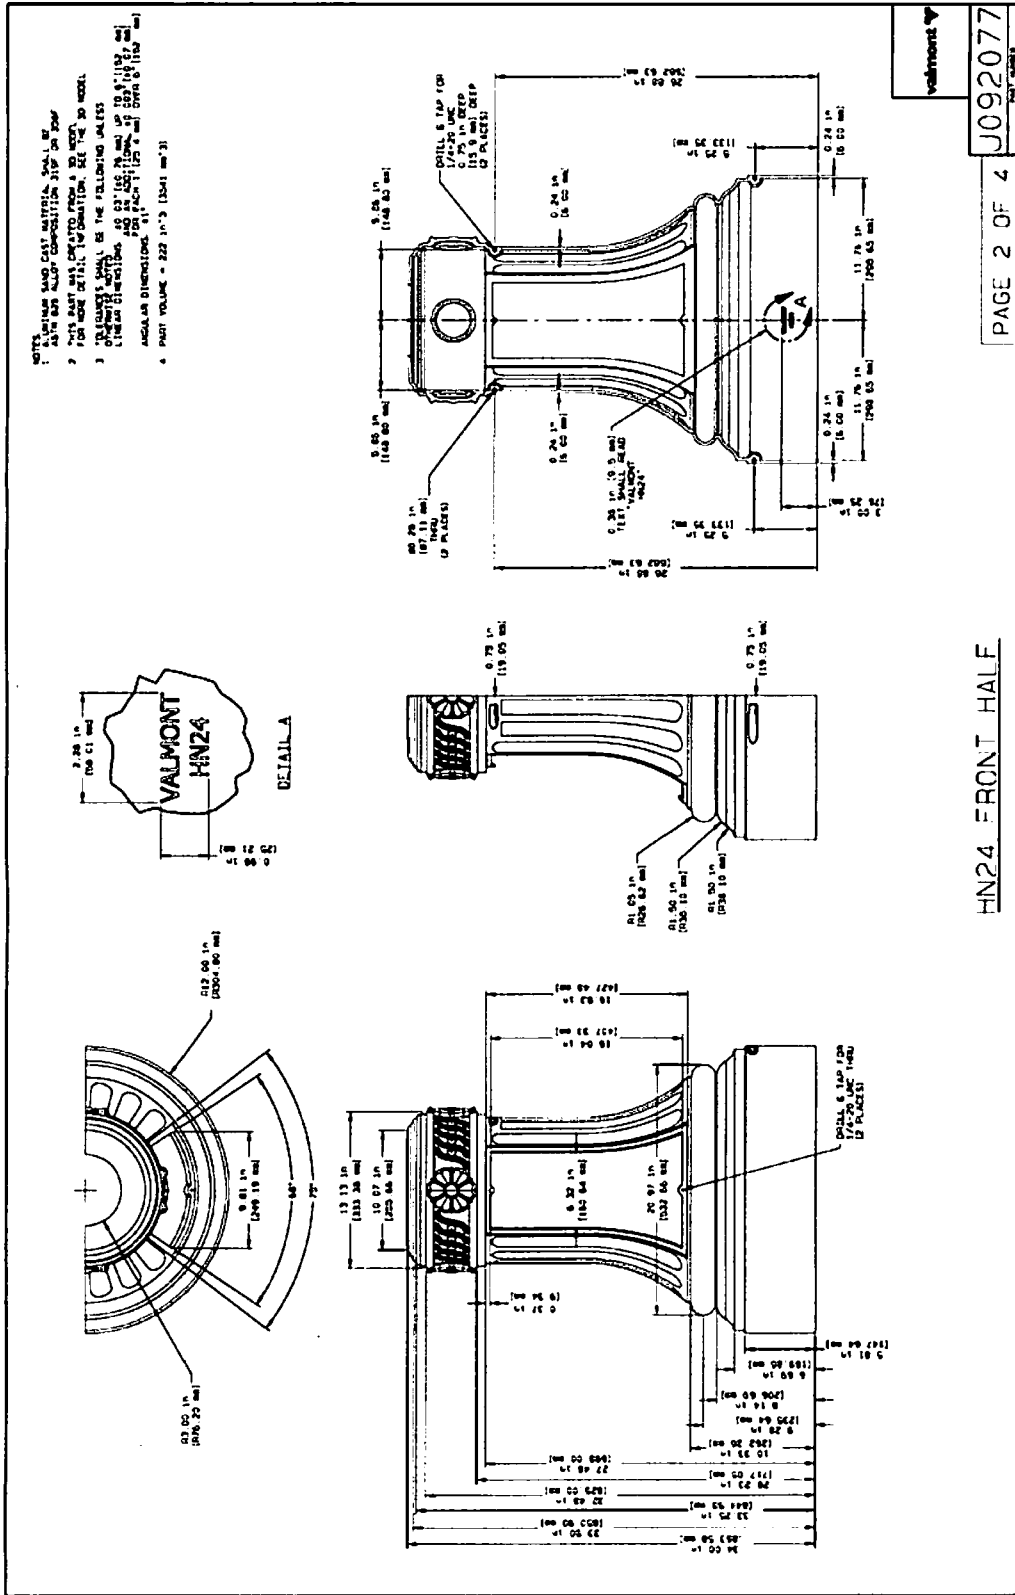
Huntington-24 Clamshell Base Details, Test No. LST-353-04
